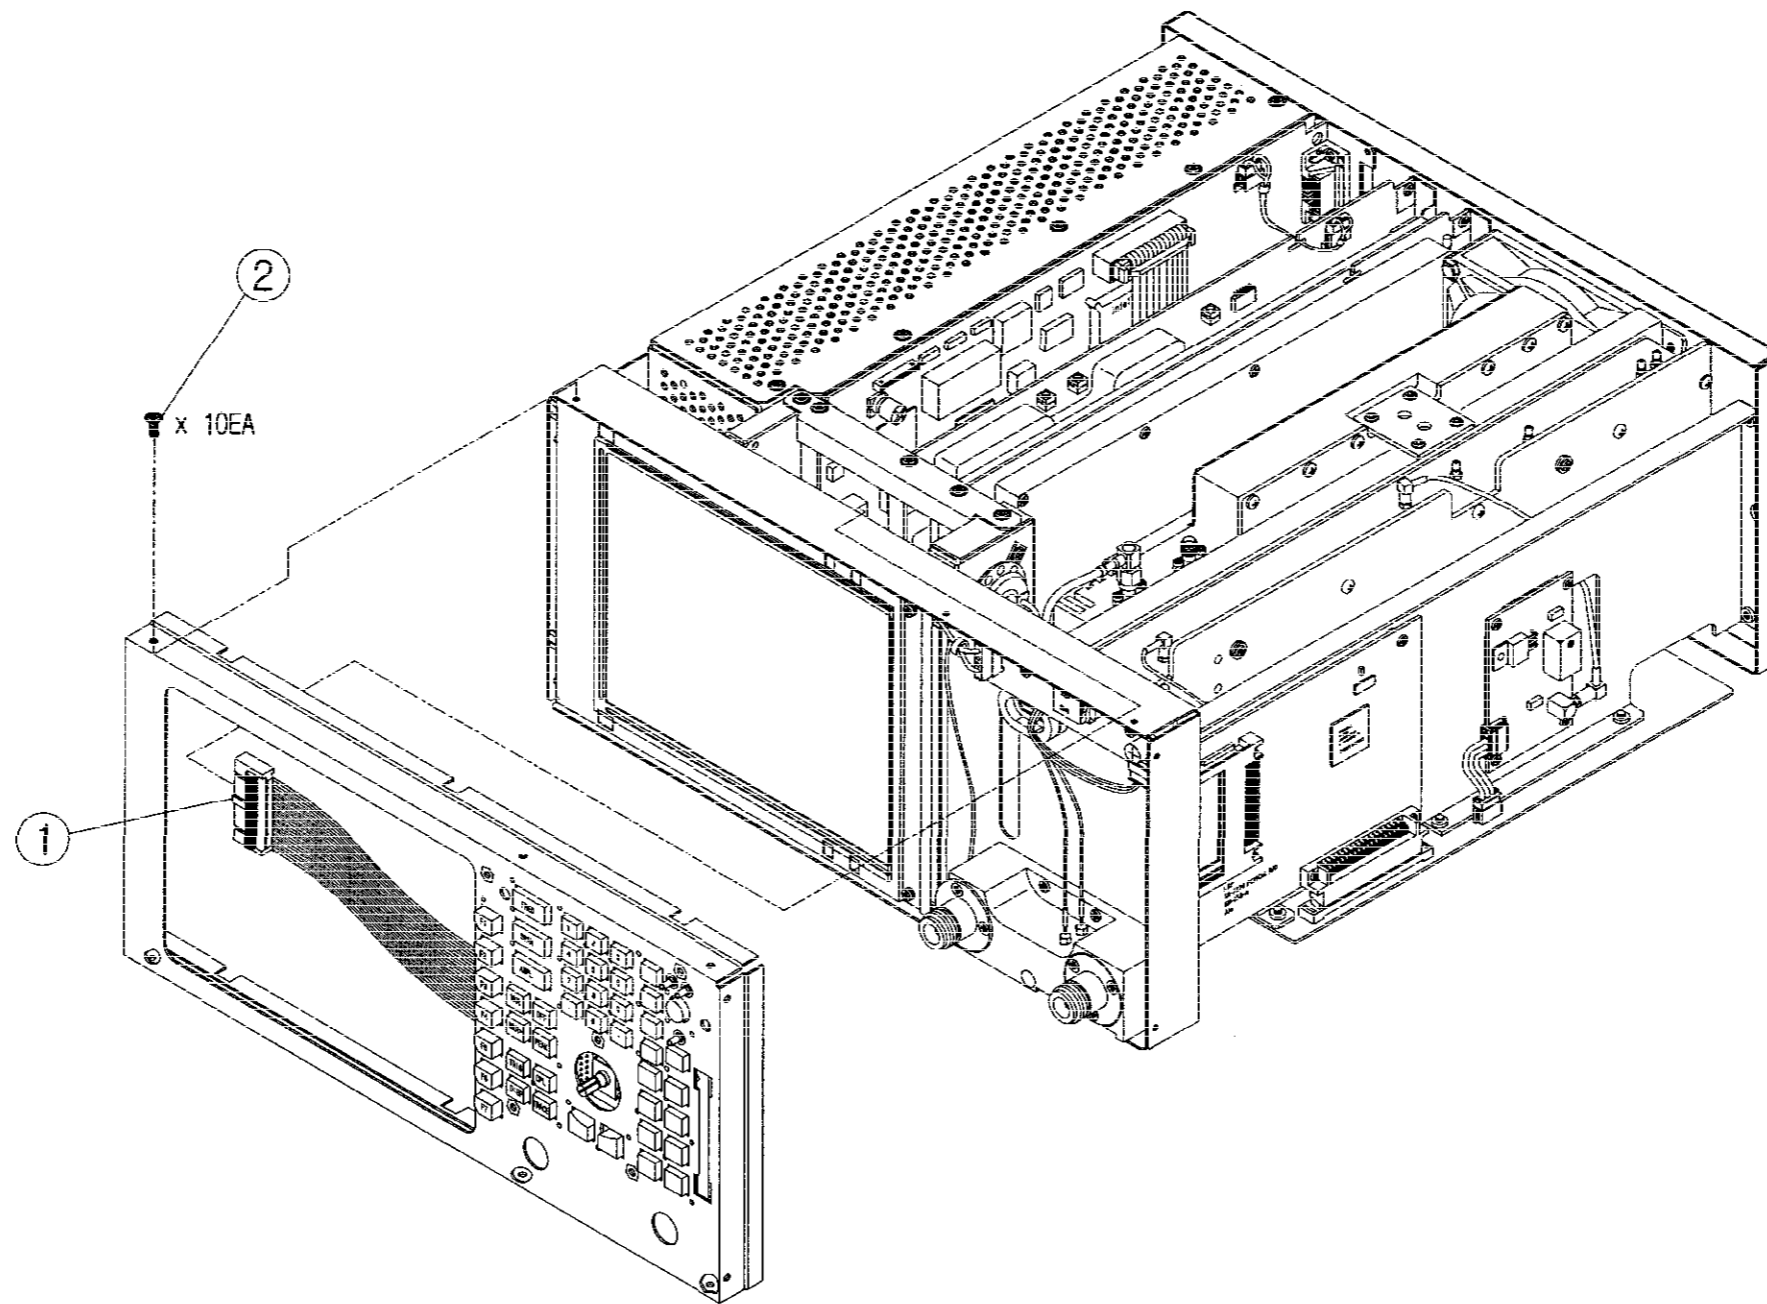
FRONT FRAME ASSEMBLY 5-15
